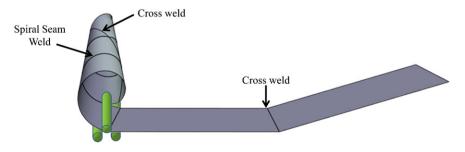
Schematic depicting spiral welding procedure for tapered tube sections.
